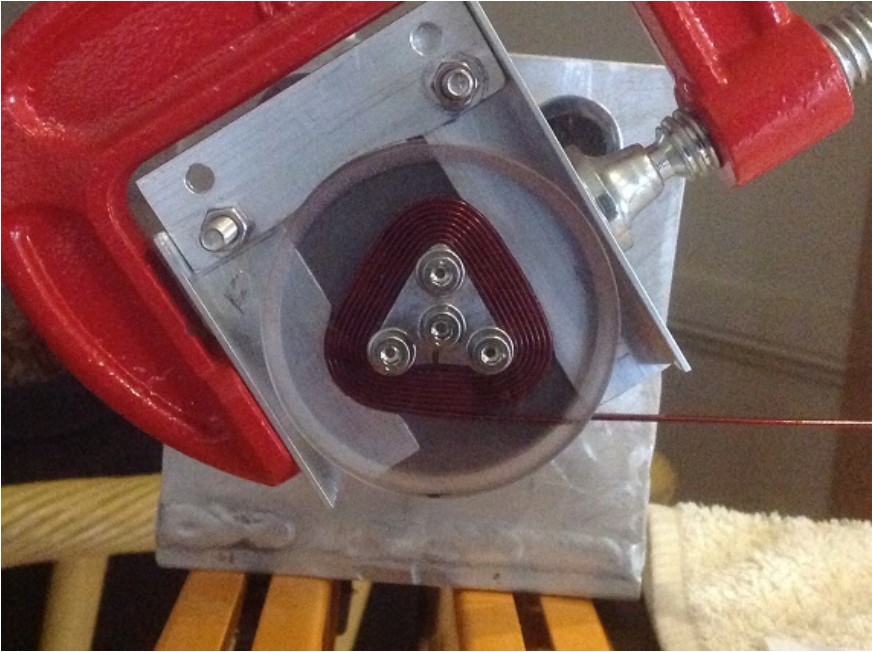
A single layer coil is clamped while under tension before removing from the winding machine.
